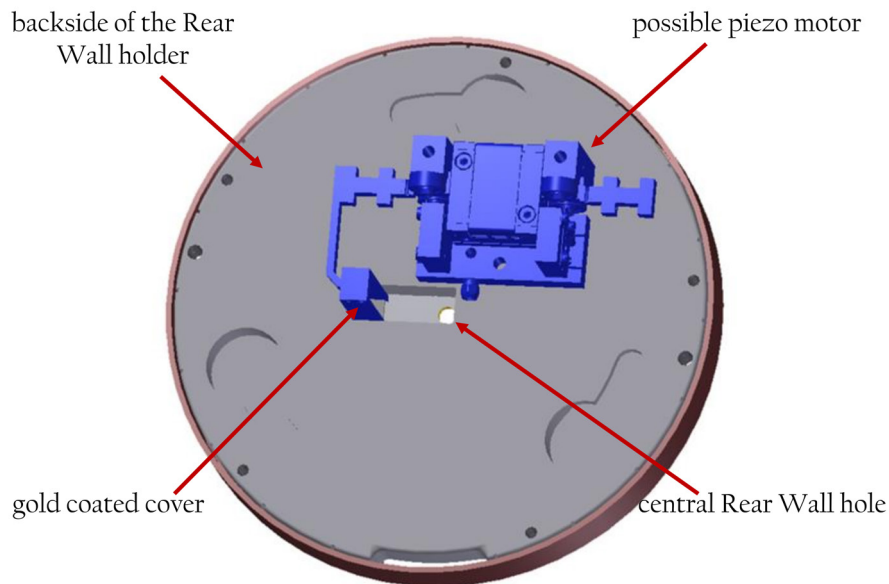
CAD-drawing of the integration of a possible piezo motor on the backside of the Rear Wall holder in the Rear Section setup. On the moving part of the piezo motor a gold coated cover is installed. This cover can be moved in front of the central hole of the Rear Wall. In doing so, a complete gold surface is facing the tritium plasma.
